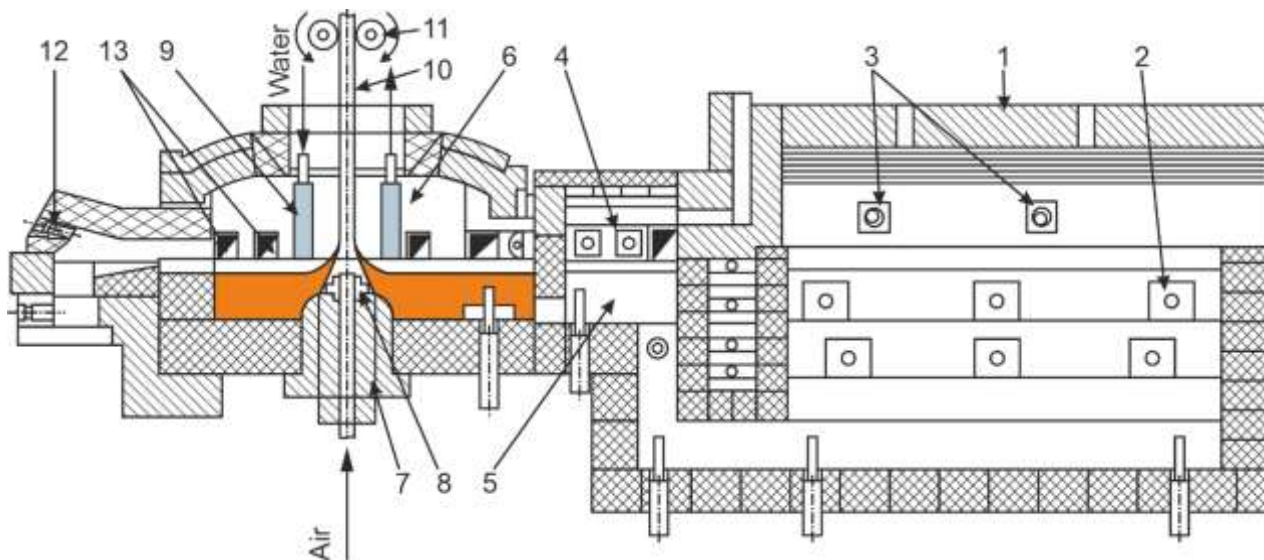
Device for drawing of tubes upward: 1 - melting unit, 2 - electrodes, 3, 4 - burners, 5 - canal, 6 - working chamber, 7 - forming body, 8 - forming nozzle, 9 - cooler, 10 - drawn tube, 11 - drawn rollers, 12 - burners, 13 - flues
